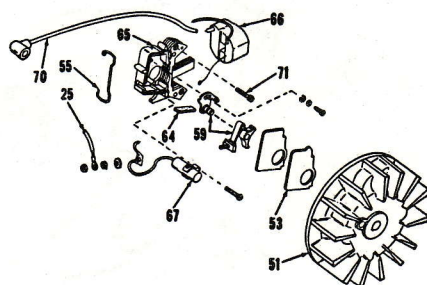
Exploded view of magneto used on GS-2016 and B316. Timing is non-adjustable.
